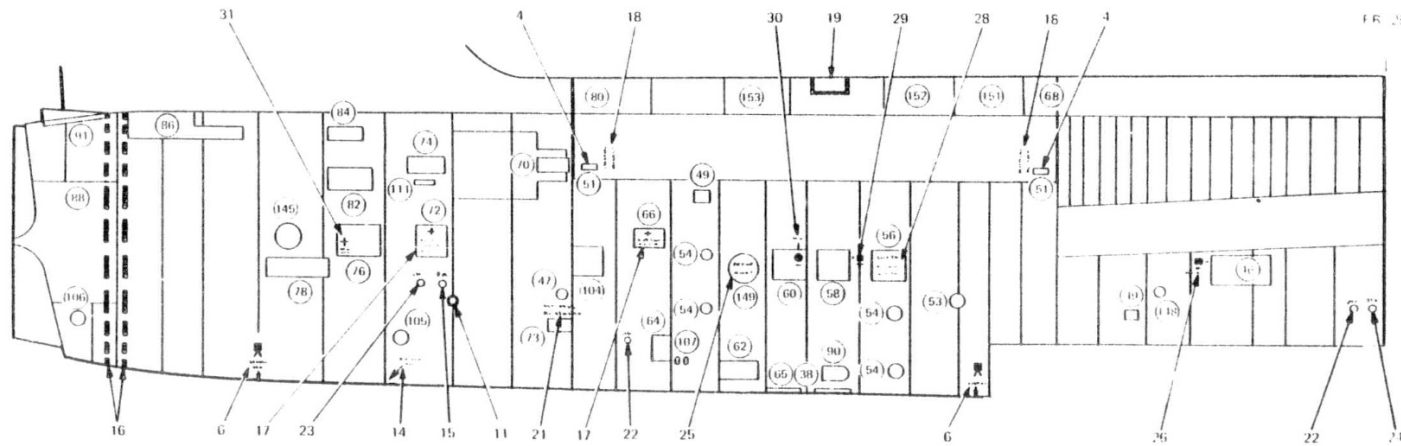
EXTERNAL MARKINGS ~ FRONT FUSELAGE ~ SERVICING
